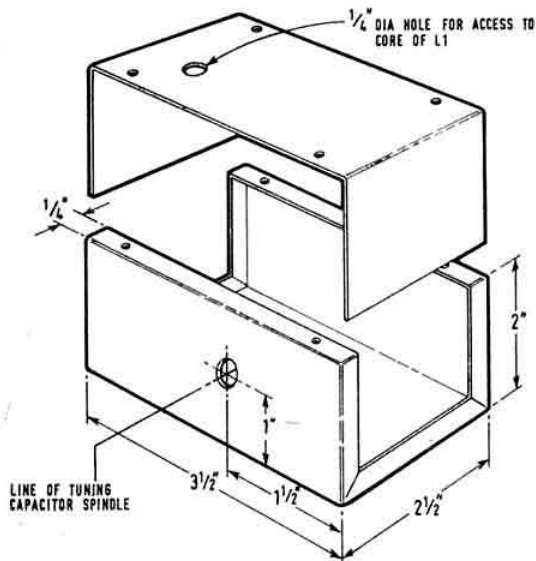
V.f.o. box/chassis and cover assembly. The box and cover are constructed from 18 s.w.g. aluminium and the cover is secured in place by four PK screws. The hole which allows access to the core of L1 should be drilled after L1 has been fitted to ensure correct register. Supply leads to, and the output from the v.f.o. are taken through holes in the base of the box drilled under the tag strip (see Fig. 4). An Eddystone diecast box No. 650 may be used, without much change of layout.
